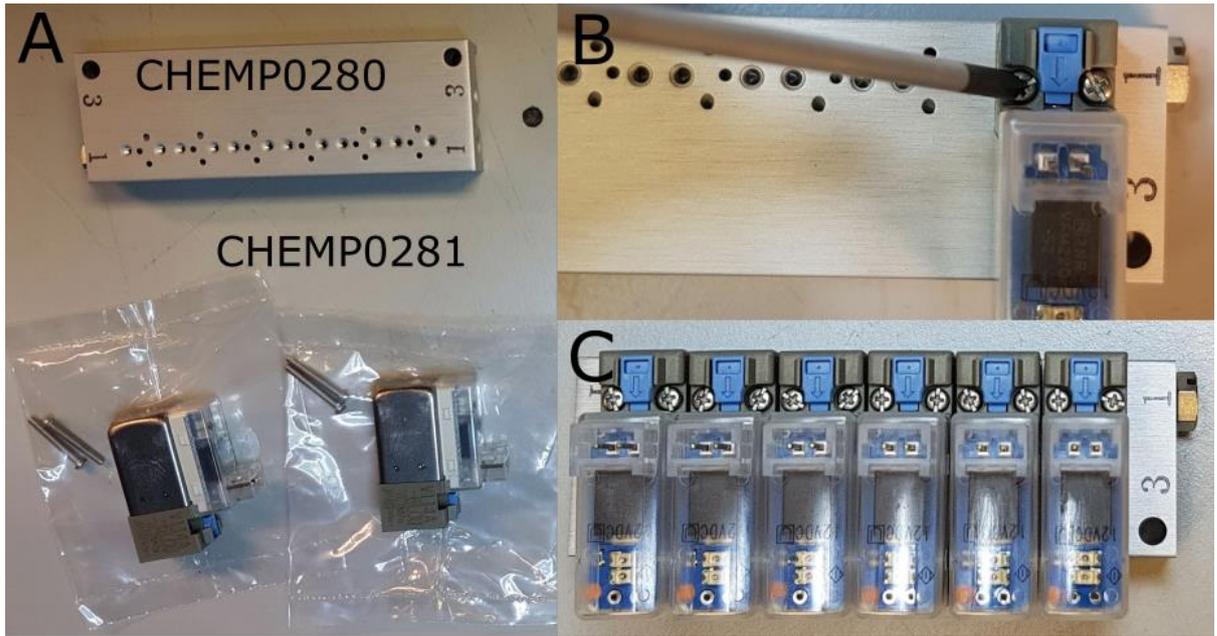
Assembly of the backend valve manifold: A) the source parts, B) mounting of the first valve on the manifold base and C) the fully assembled valve manifold.
